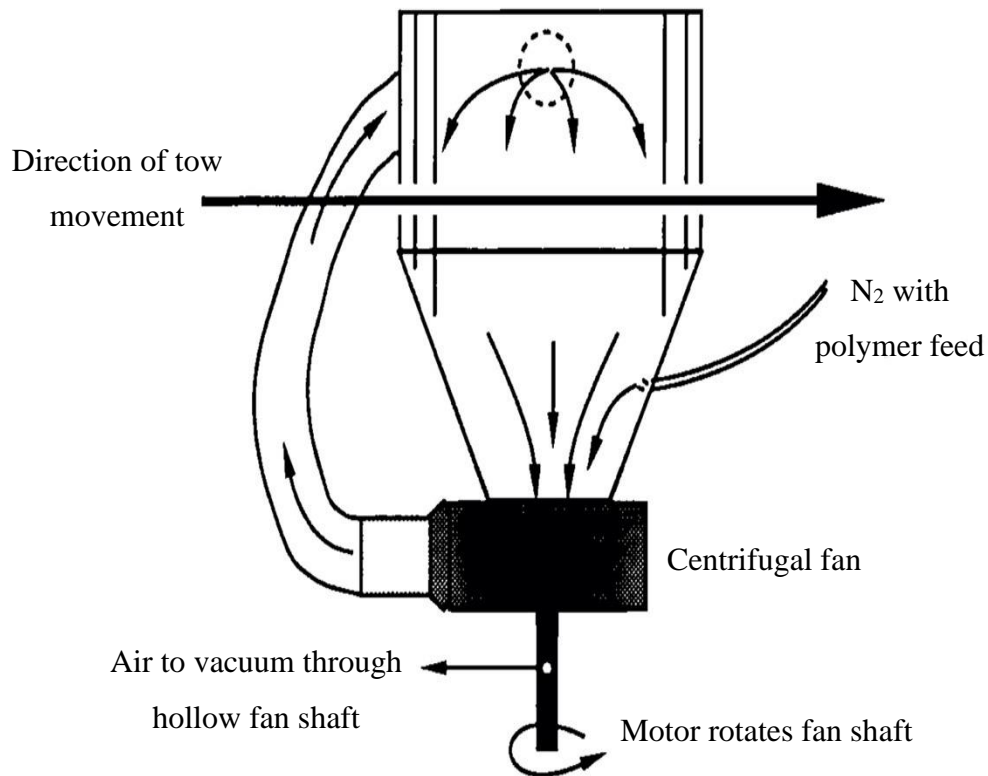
Recirculating fluidised chamber mechanism [172].
